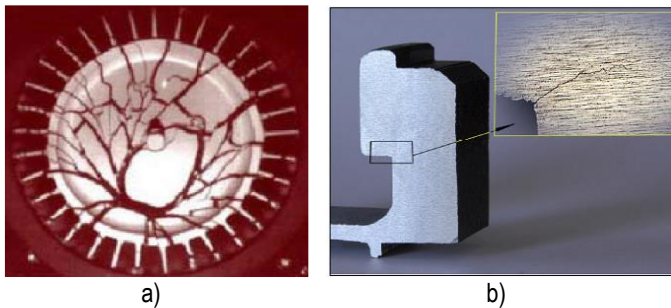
Illustrations: a) disc failure during destructive tests [15]; b) cracking of the blade mounting seat [16]
